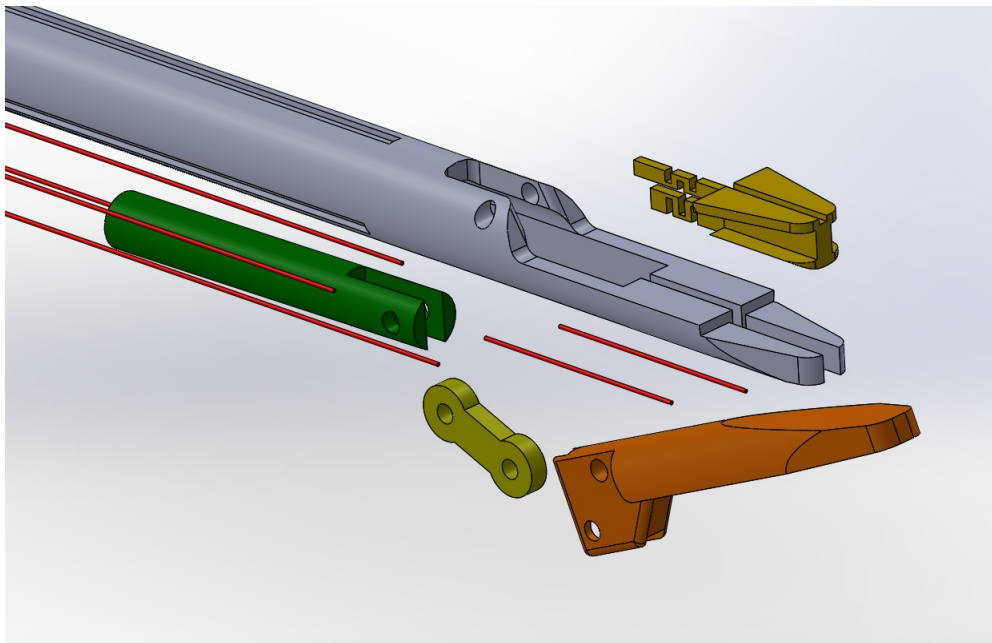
Expanded view of the final prototype of the sensorized instrument
